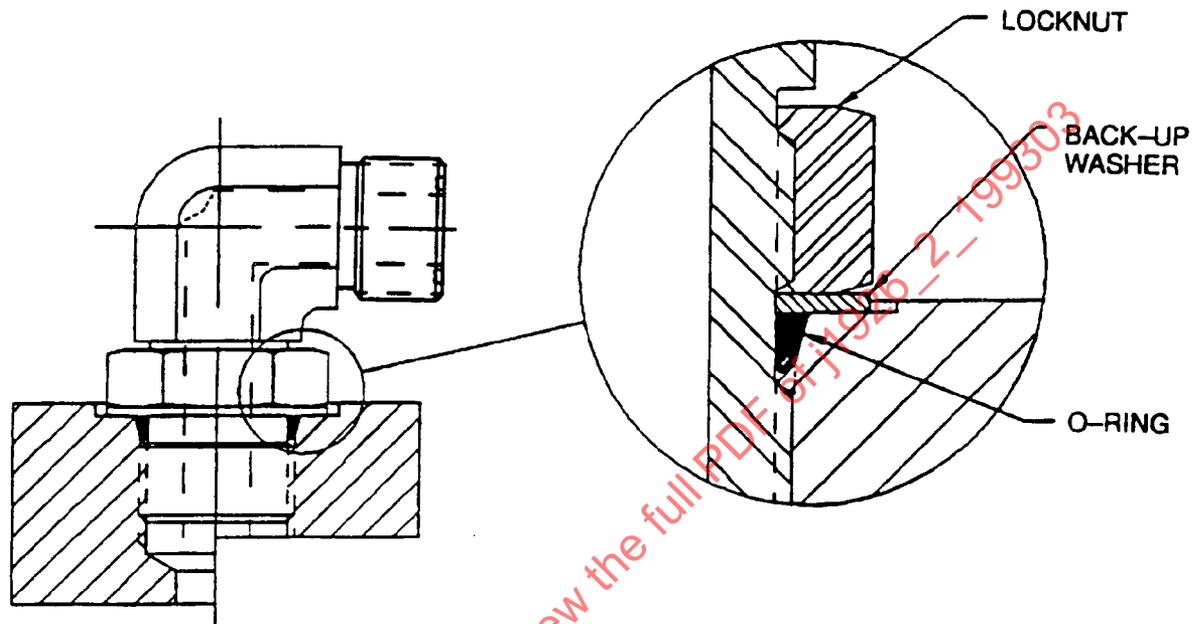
FINAL ASSEMBLY OF ADJUSTABLE STUD END
